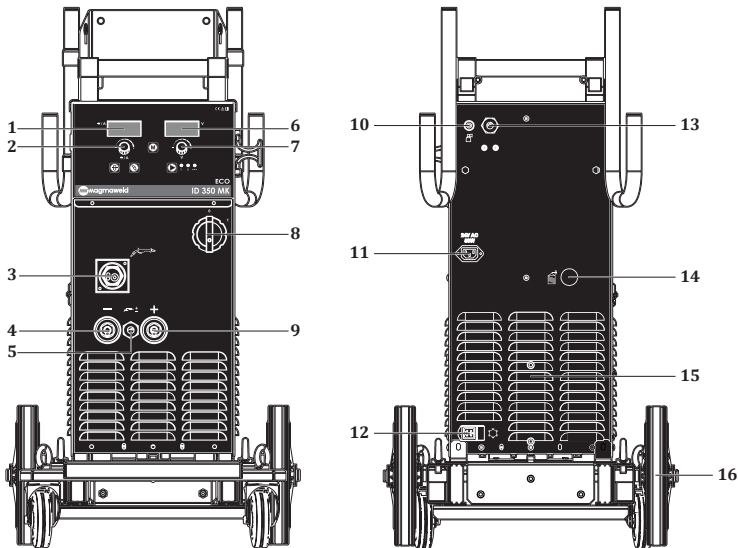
ID 250 - 350 MK ECO Front and Rear View
